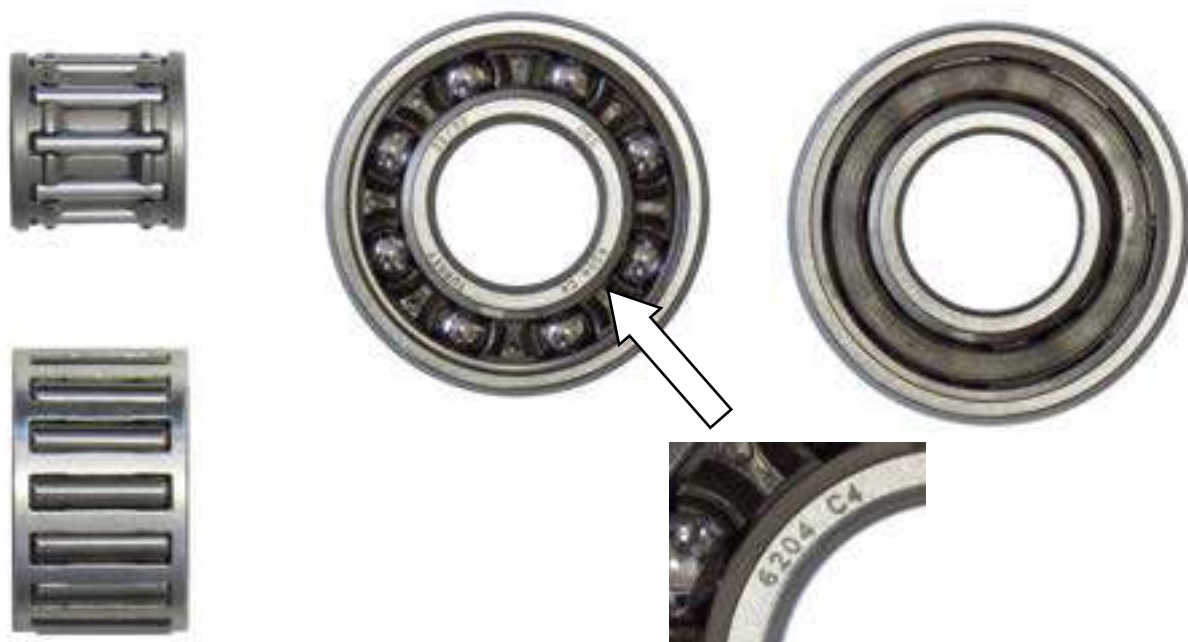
PHOTO IDENTIFICATION: SMALL & BIG END CONROD BEARING AND MAIN BEARING
